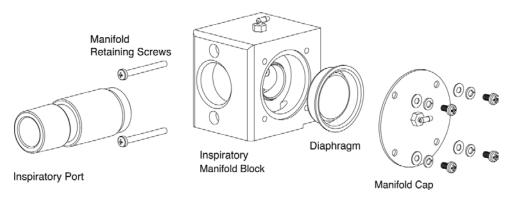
Disassembly and Reassemby of the Inspiratory Manifold
